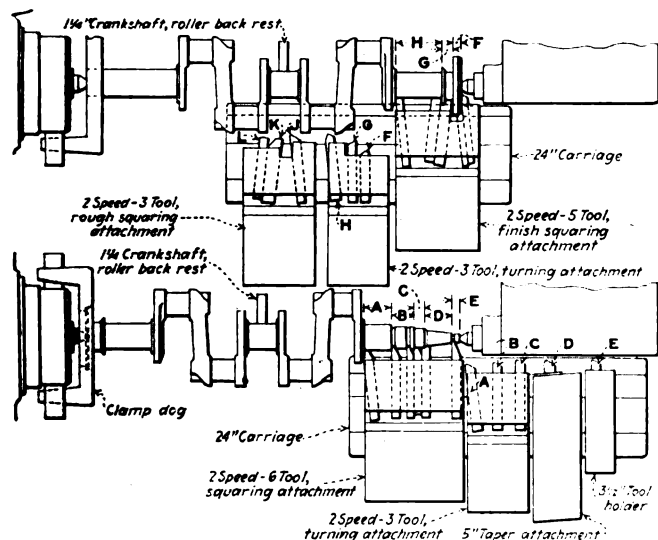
TOOL LAYOUT ON LO-SWING LATHE
